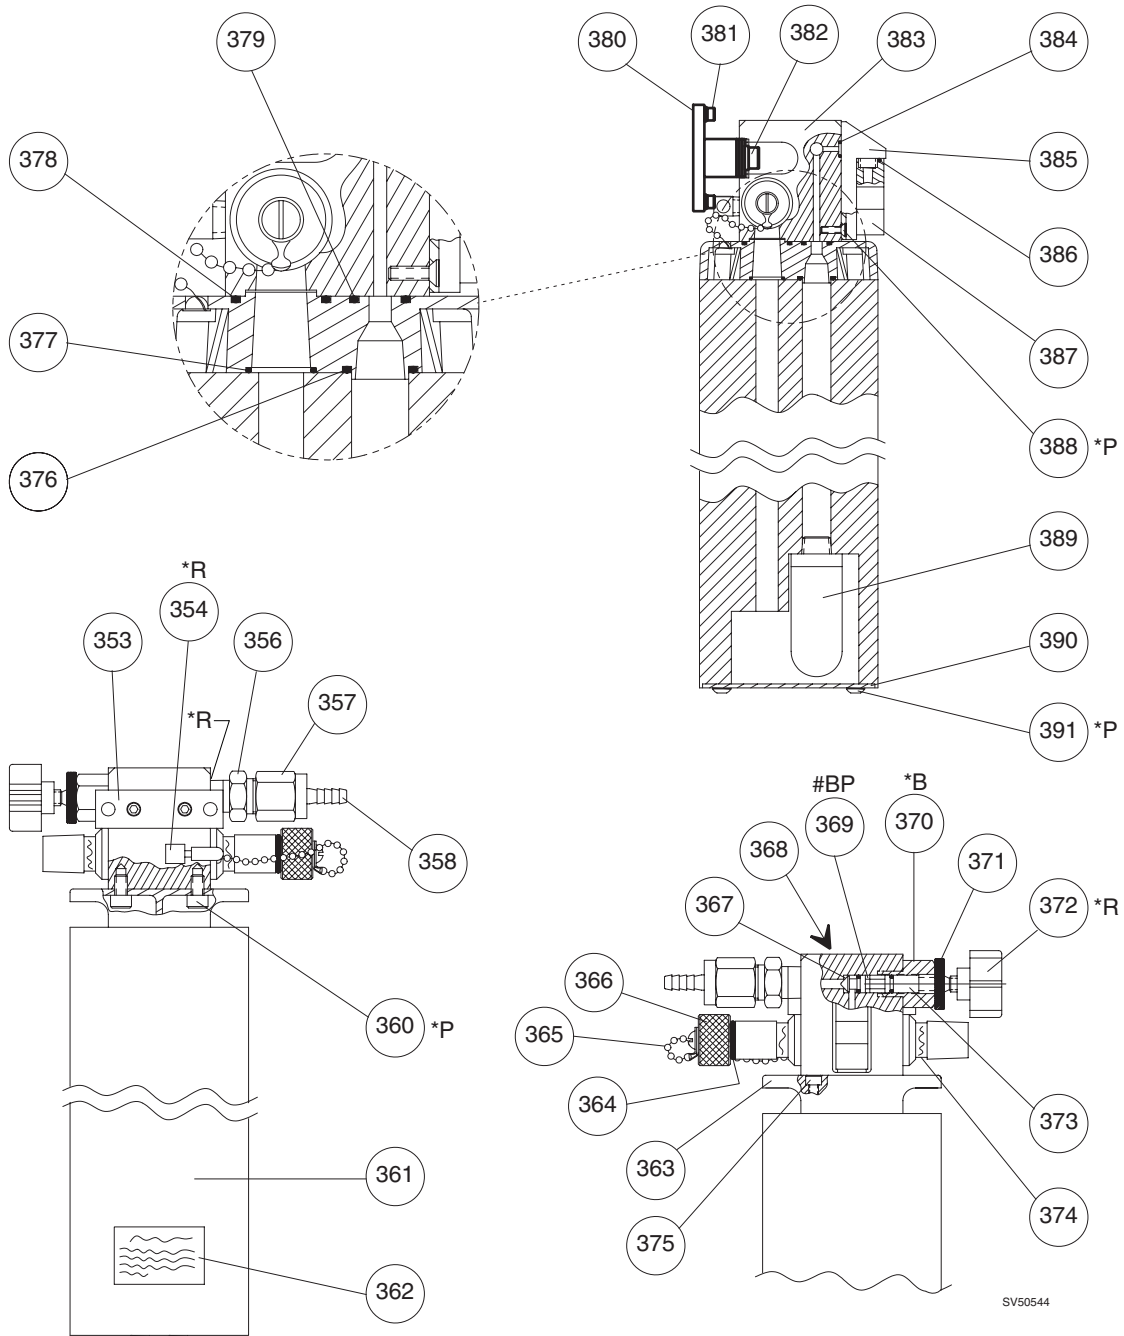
Auxiliary O2 Flowmeter Assembly
